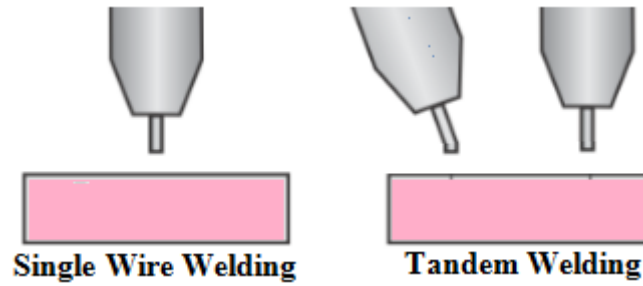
Schematic views of the single wire and tandem welding processes.
